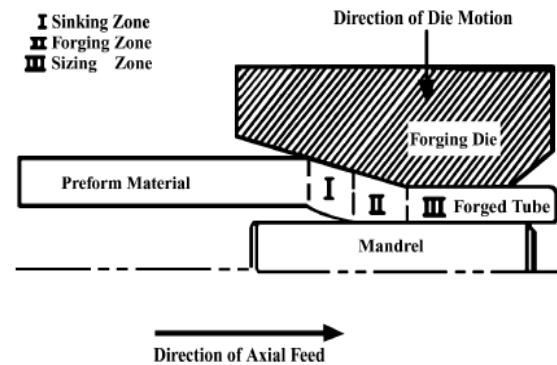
Deformation zones (sinking, forging and sizing) in tube radial forging process [3]
